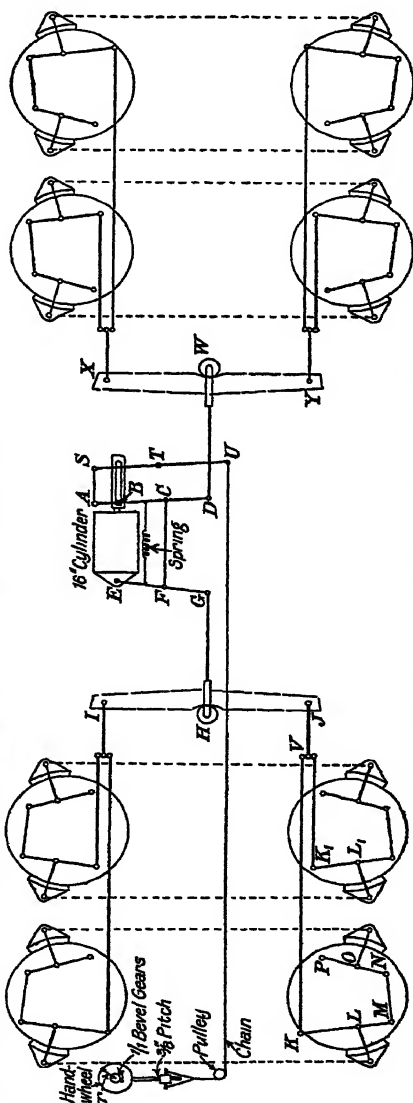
Complete Brake Rigging Diagram for Motor Coach.
